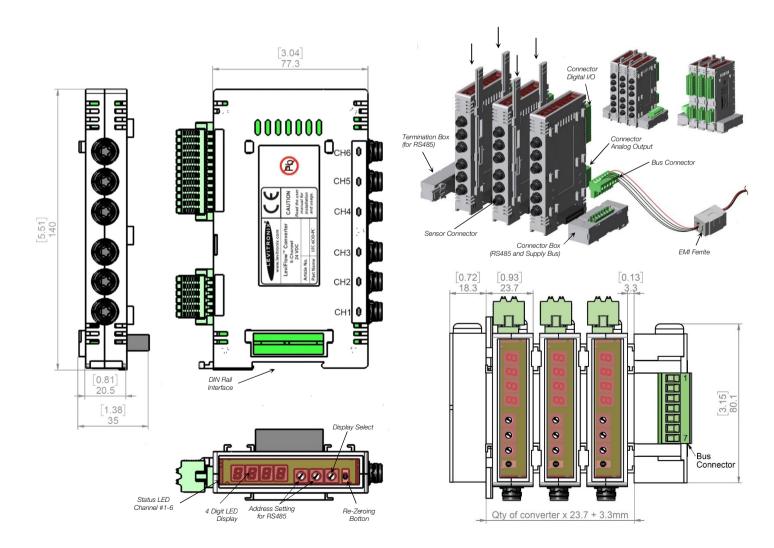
Dimensions, mounting and stacking concept of LFC-6CIO-PC
